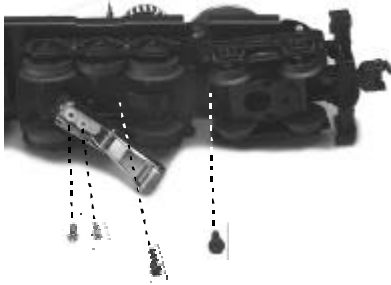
Removing the pick-up, motor mount, and Flathead Pilot/Trailing Truck Screws
